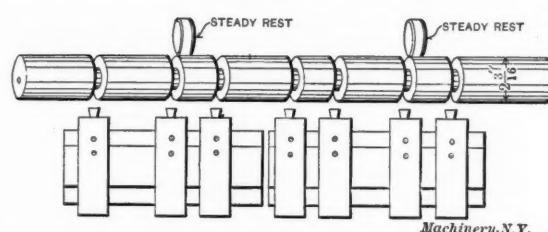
First Operation in Turning Cam-shafts on the "Lo-Swing" Lathe
